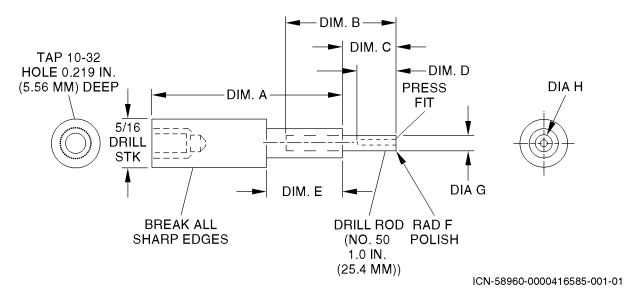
Contact Seating Inspection Kit Contact Adapter, T3009406-14
